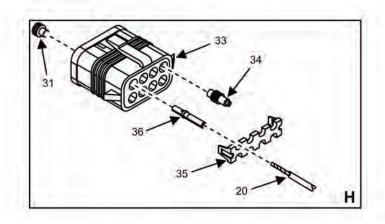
Engine Wiring Harness (Sheet 3 of 15).
